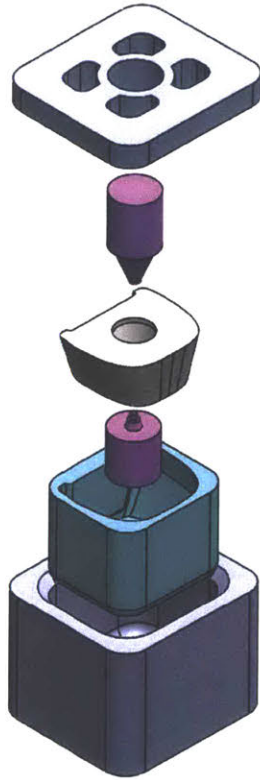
A five-part 3D printed mold is used to cast the nozzle.
